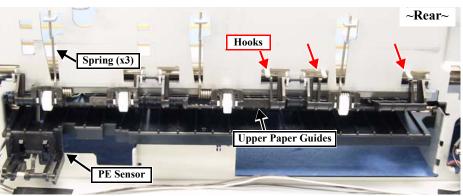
Upper Paper Guides Layout (rear of the printer)
